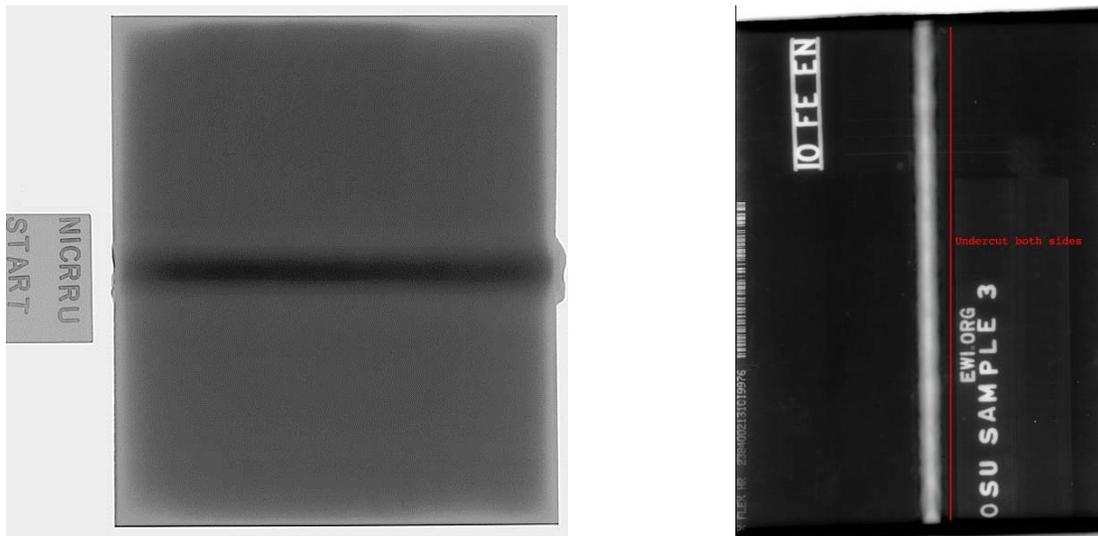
Radiographs of the ENiCuRu and ERNiCuRu Weld Test Assemblies
